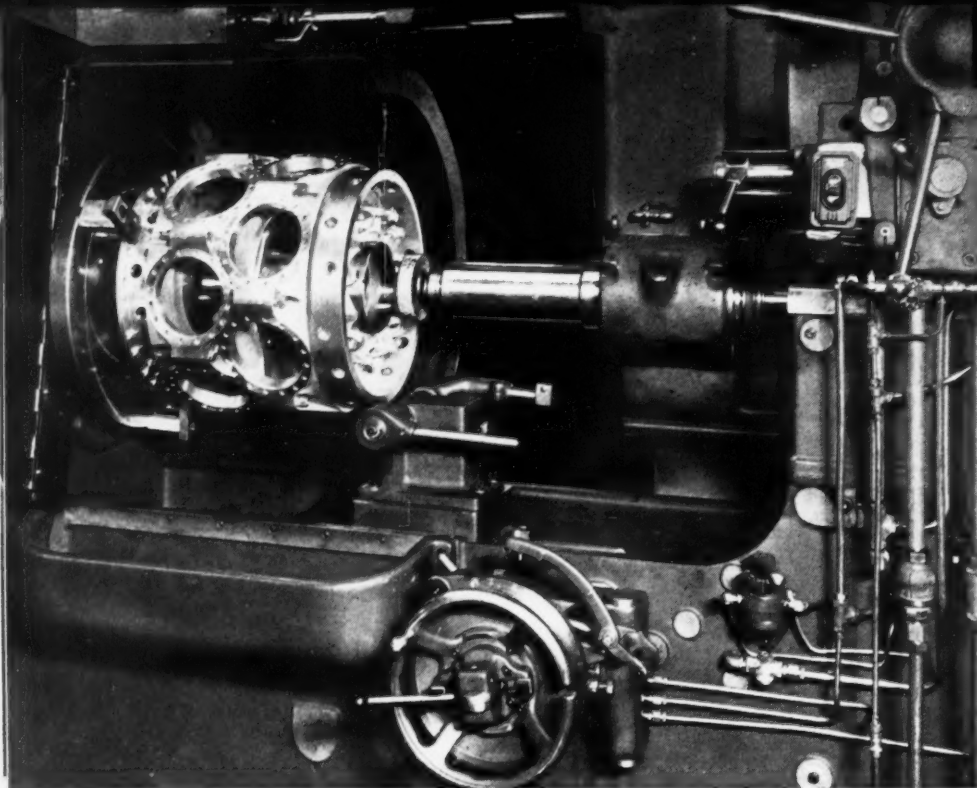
Internal Grinder with Telescoping Cross-feed Screw and a Special Diamond-holder for Dressing Wheel Used in Grinding Bearing Retainers in Aluminum Crankcase
